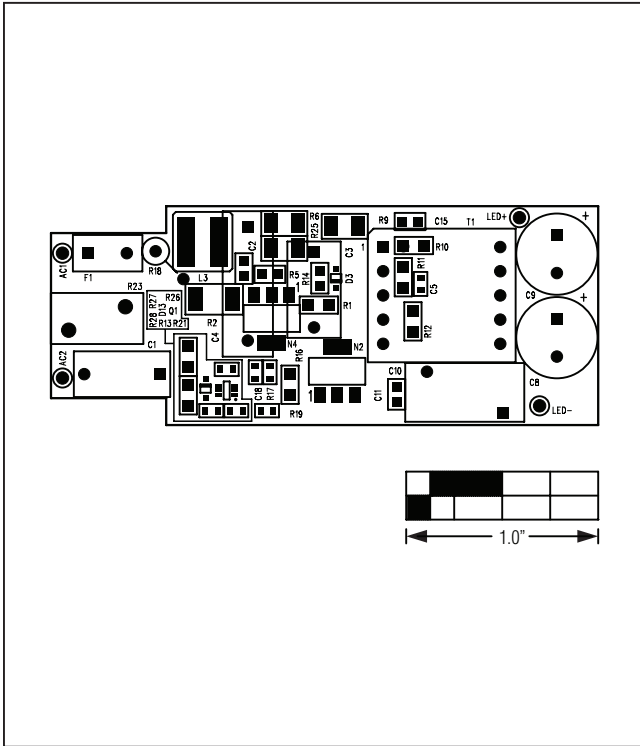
MAX16841 EV Kit Component Placement Guide—Component Side
